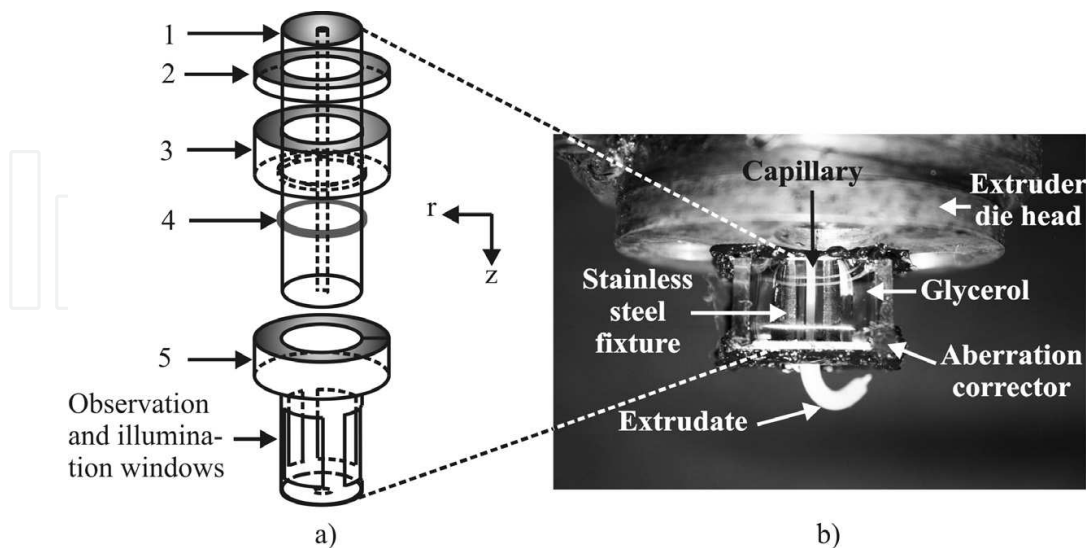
a) Stainless steel fixture to support glass capillary in the extruder die head: 1) borosilicate glass die, 2) cooper ring, 3) stainless steel ring, 4) high-temperature o-ring, 5) stainless steel fixture. b) Aberration corrector made up of a small rectangular prism with glass wall filled with glycerol.
